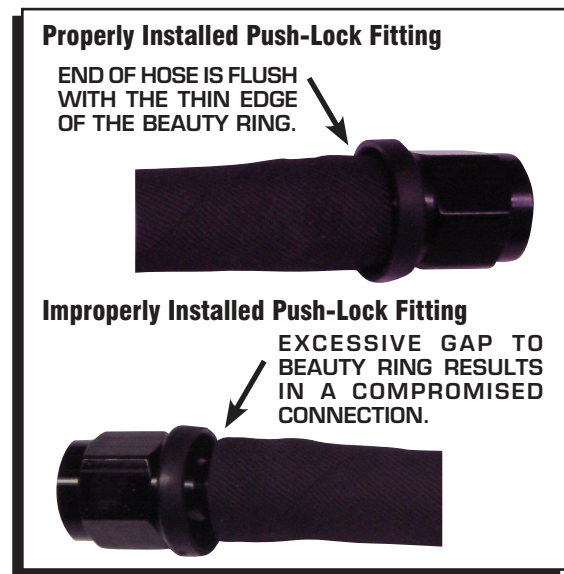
Installing Fuel Hose to the Push-Lock Fittings.
